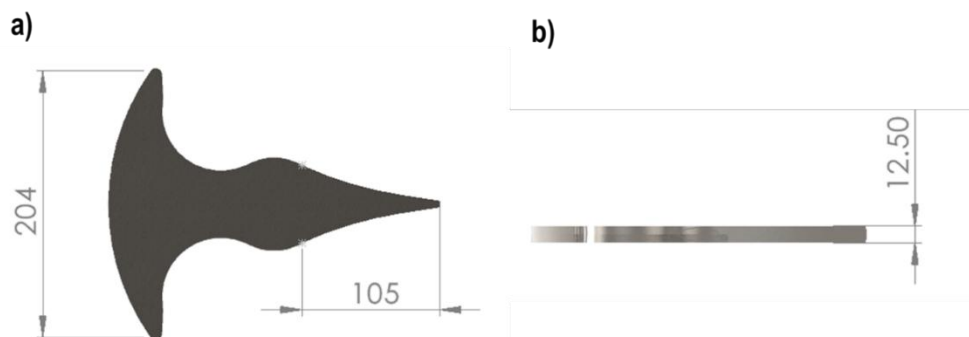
Dimensions of the axe blade: a) front view, b) side view
